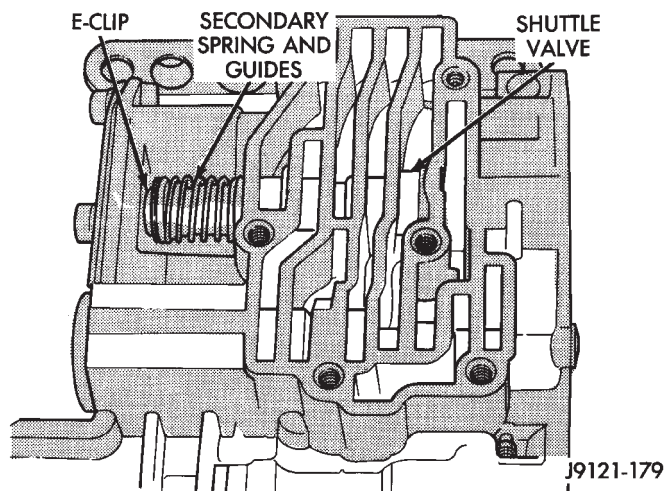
Shuttle Valve E-Clip And Secondary Spring
